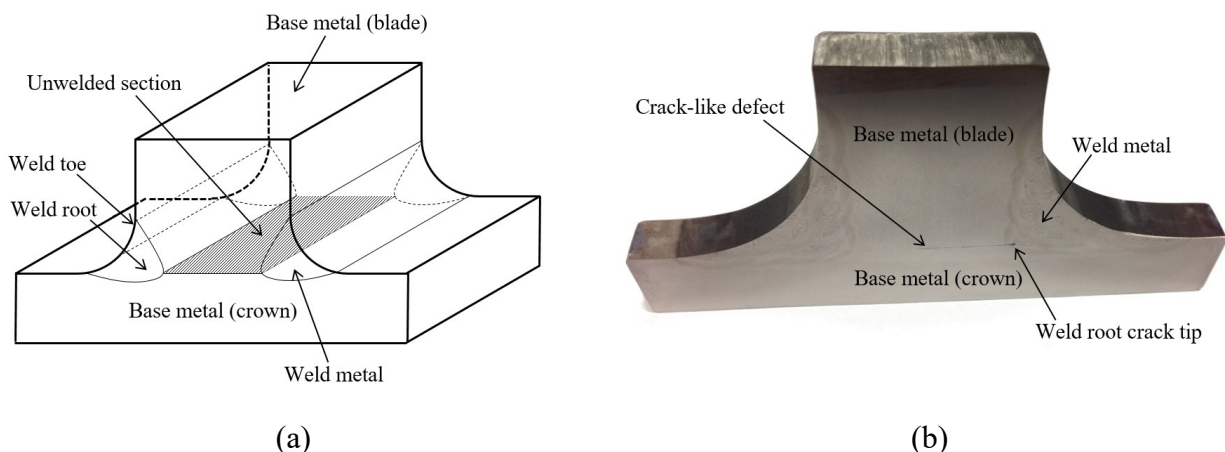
Partially penetrated welded joint analogous to the joints of thick blades and band/crown in a Francis turbine runner or hub in a propeller runner: (a) schematic view of the PJP weld and (b) macrograph of weldment for the PJP
